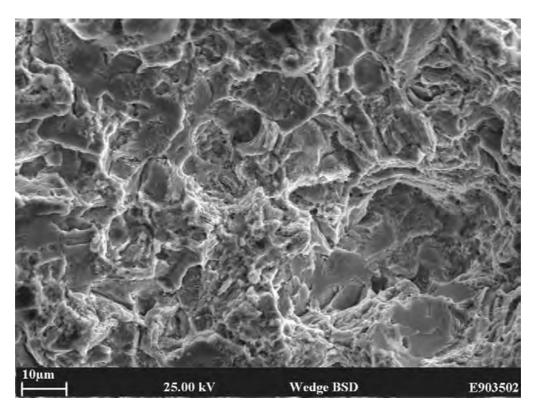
SEM fractograph, showing cleavage fracture apparent at the left hand hole edge of figure 28.
